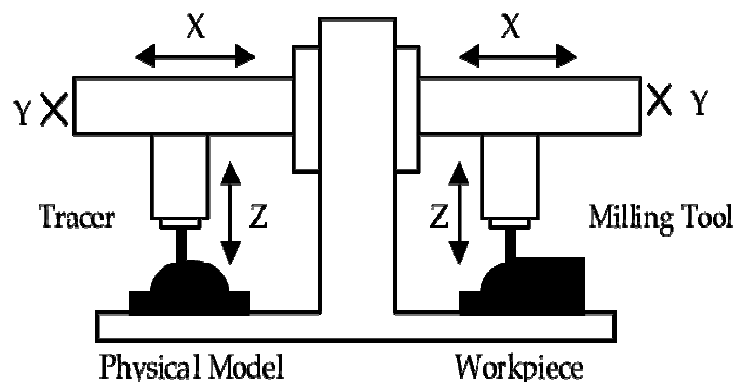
Schematic Diagram of Copy Milling Machine [29].
